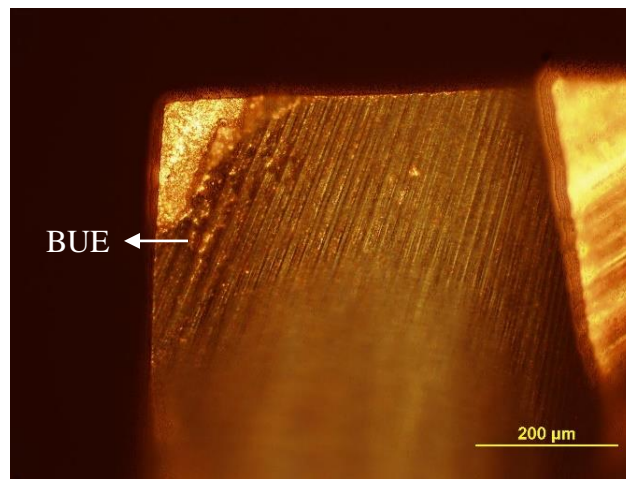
Tool rake surface of uncoated WC after machining 4 slots, length 32 mm, Uncoated $\Phi 0.406$ mm WC flat end mill, 15-80 m/min speed, 15 μm /tooth chip load, 100 μm depth, dry and MQL, A36 carbon steel workpiece.
